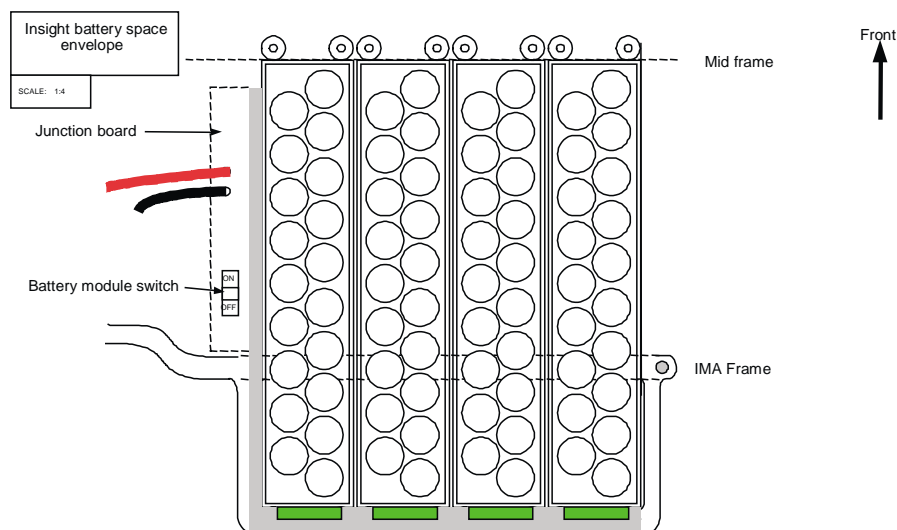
Layout of proposed four module battery pack layout for the Honda *Insight*.
